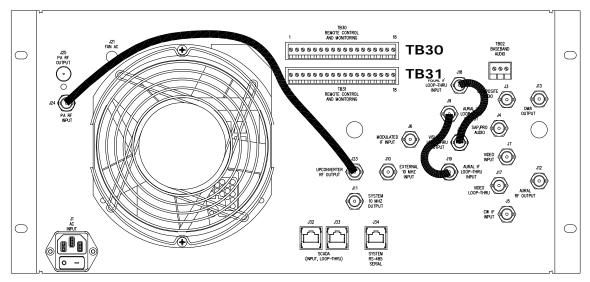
Exciter/Amplifier Chassis Assembly Rear View
